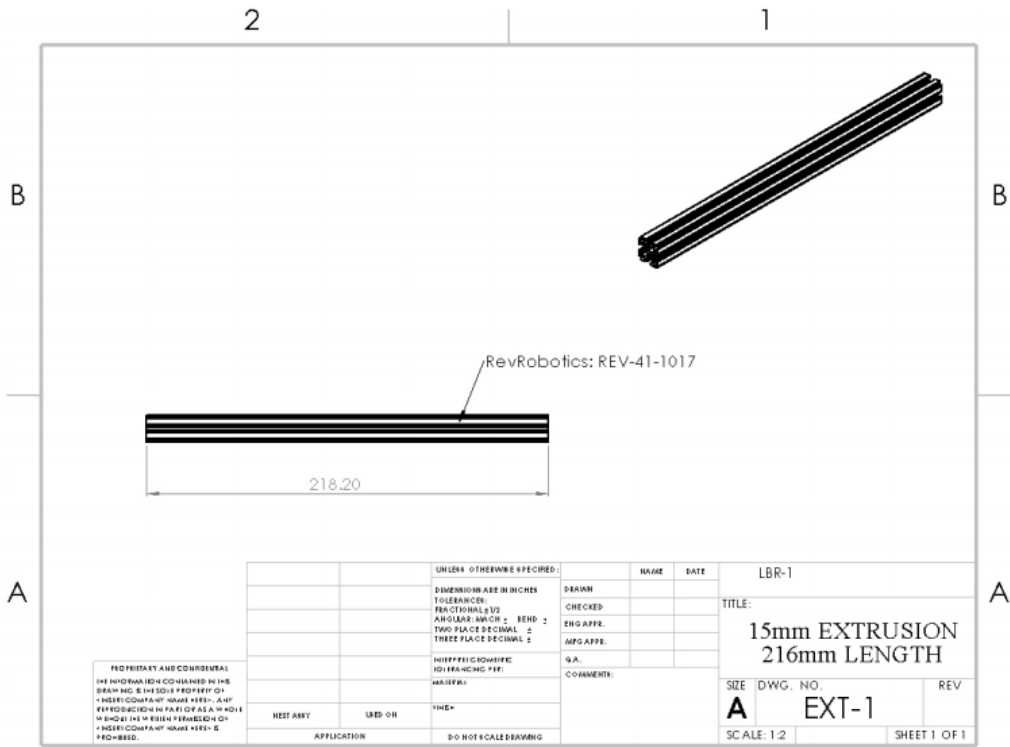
Part drawing of the 15mm extrusion to attach linear slide assembly to base plate.
